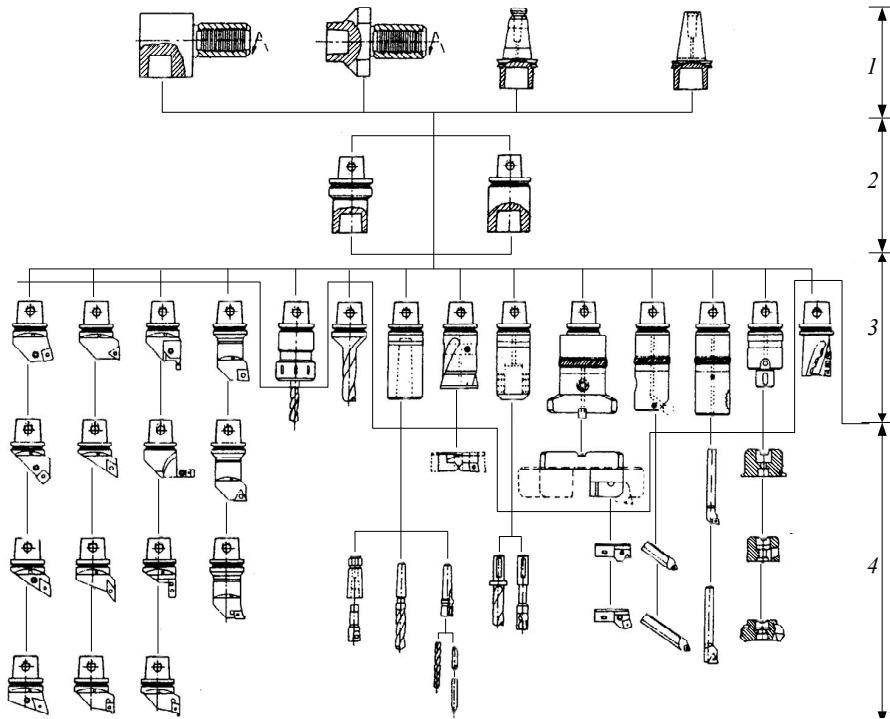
Unified tool system: 1 – master shanks, 2 – reducing or extension adaptors, 3 – holders, 4 – standard tools and tools of the system
